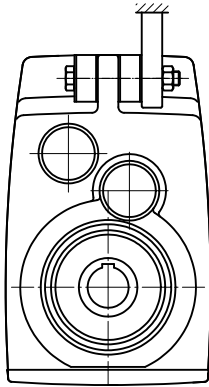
Mounting the rubber buffer (Option G and/or VG) on parallel shaft gear units
